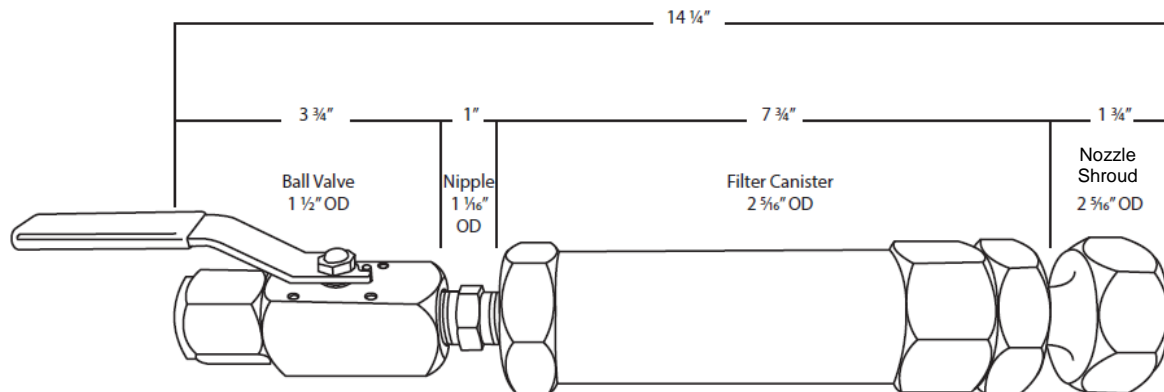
Bottom Hole Assembly for Coil Tubing Misting Applications
